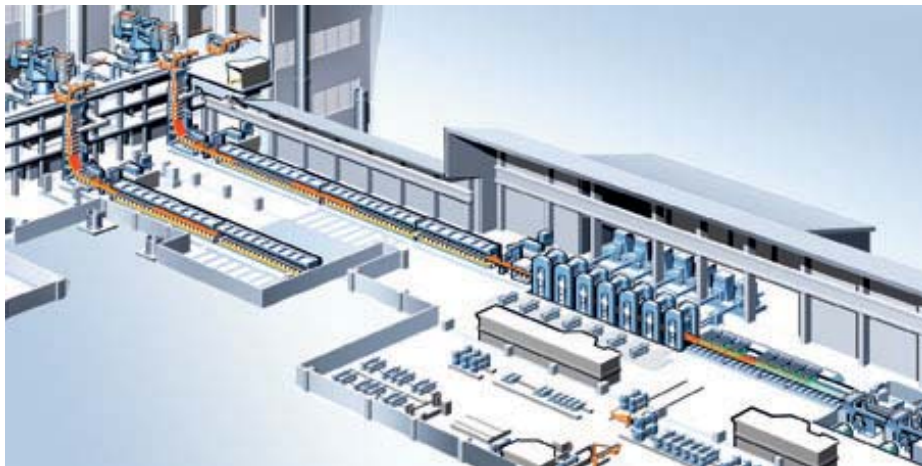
Layout of CSP[®] plant with 2 thin-slab casters, tunnel furnaces with parallel ferries and 7-stand rolling mill.
